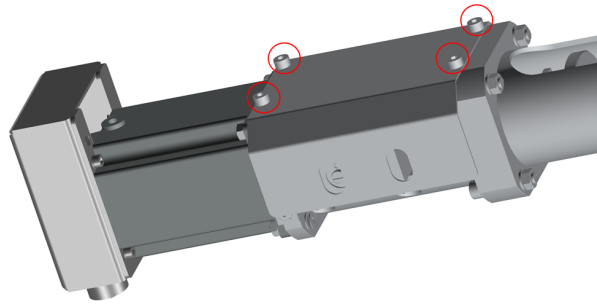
The torque limiter components can be accessed by removing the four Allen screws from the protective cover.
